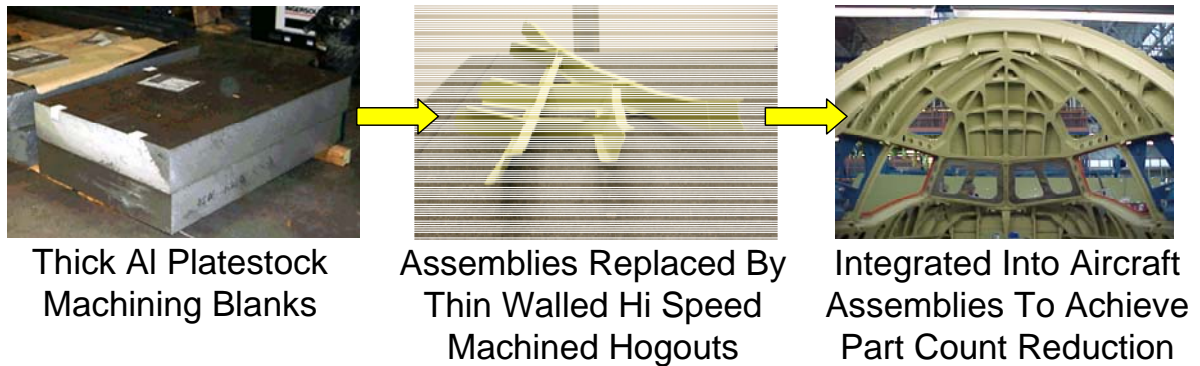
Conversion of an assembly of many pieces formed from thin sheet materials into complex, one-piece component machined from thick stock, for transport aircraft nose crown assembly.
